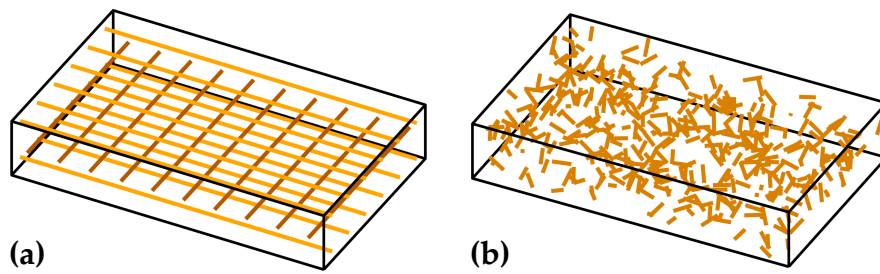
Fiber composite materials made by lay-up technique (a) and by compression or injection molding (b).
